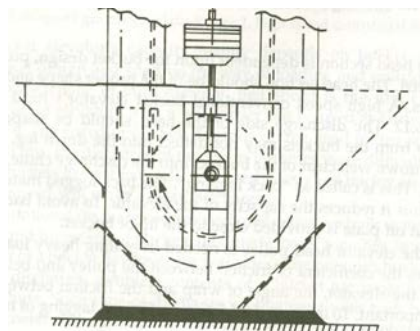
Bucket elevator boot section with automatic gravity take-up
